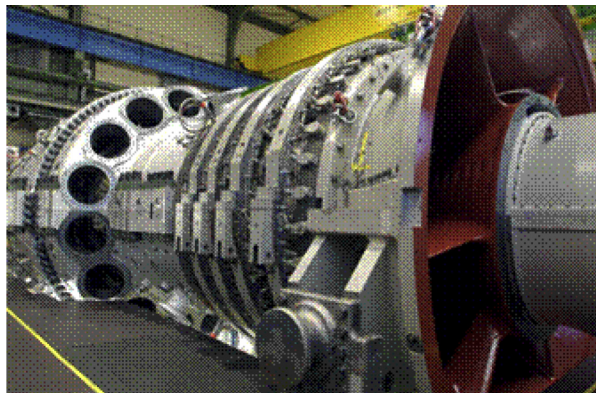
The SGT5-8000H gas turbine in final assembly [17–7].
